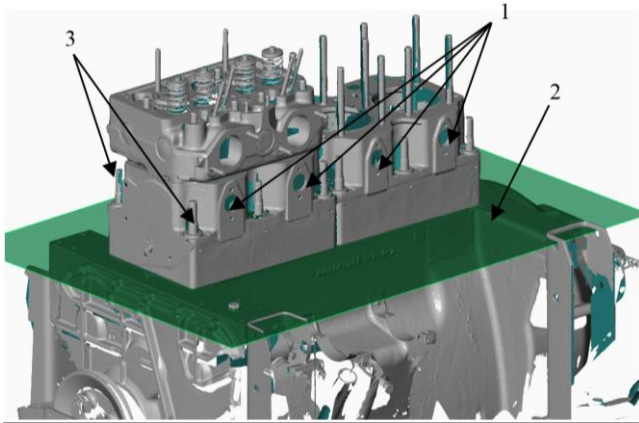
3D scan of the base engine: 1 – places for mounting the factory manifold, draining liquid from the cylinder block; 2 – the plane of division of the cylinder block and the engine block; 3 – pins on which the support plate is mounted
